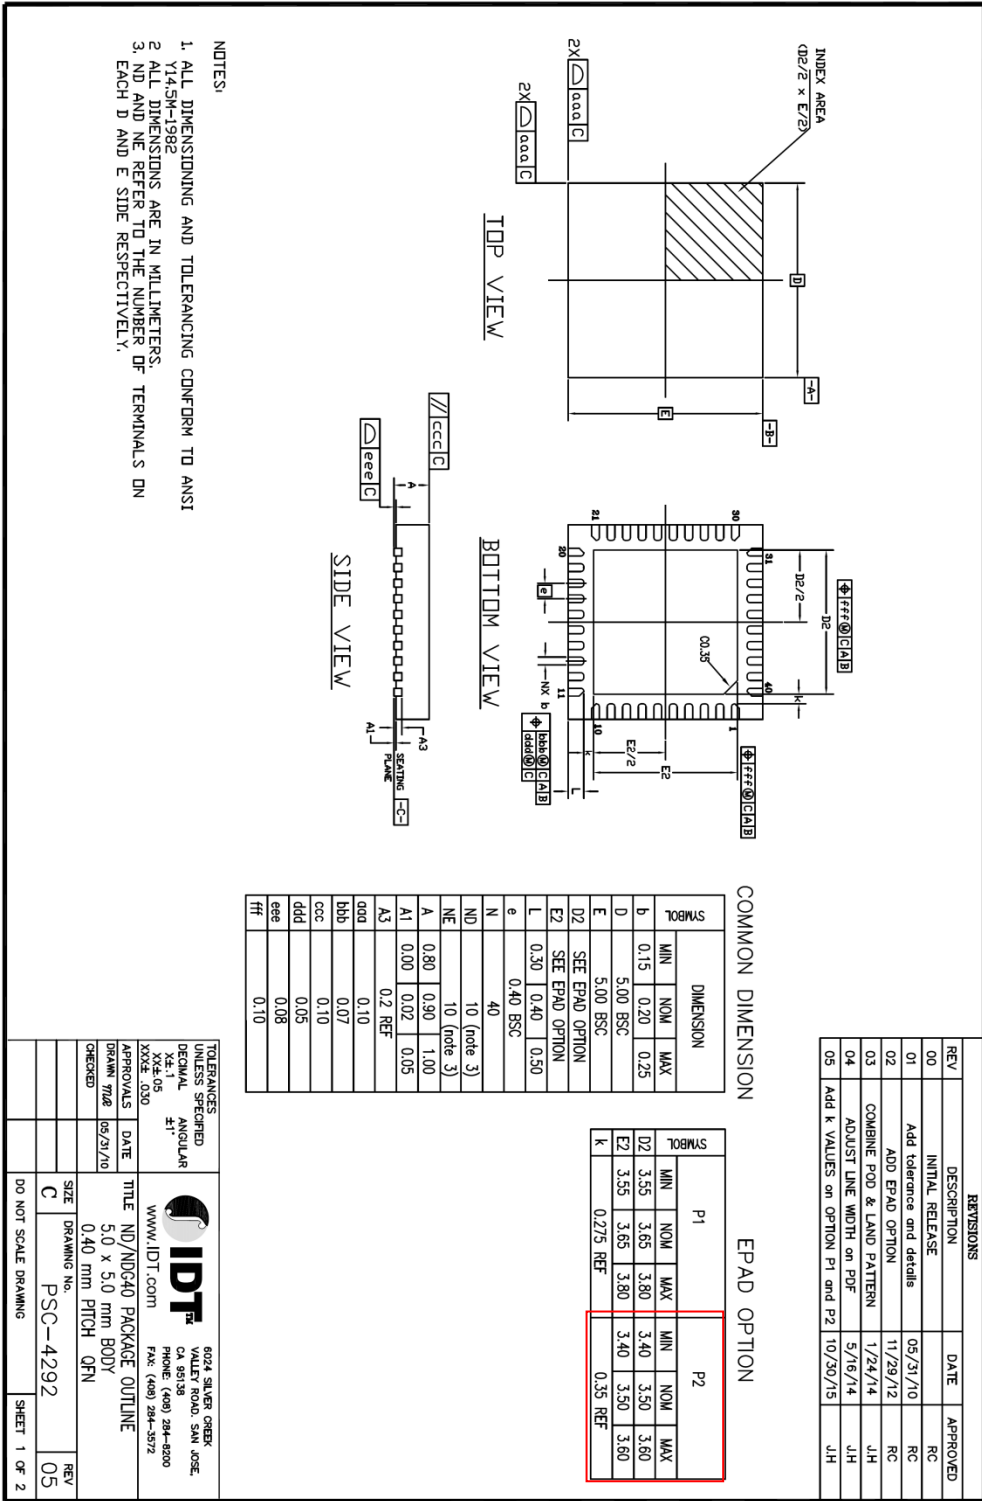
QFN-40 NDG40 5mmx5mm Package Outline Drawing (POD). P9240A uses Option P2.
